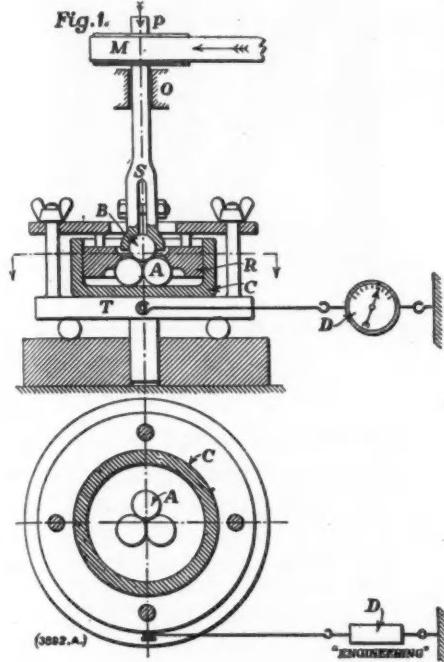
Diagram of four-ball type of lubricant-testing machine
